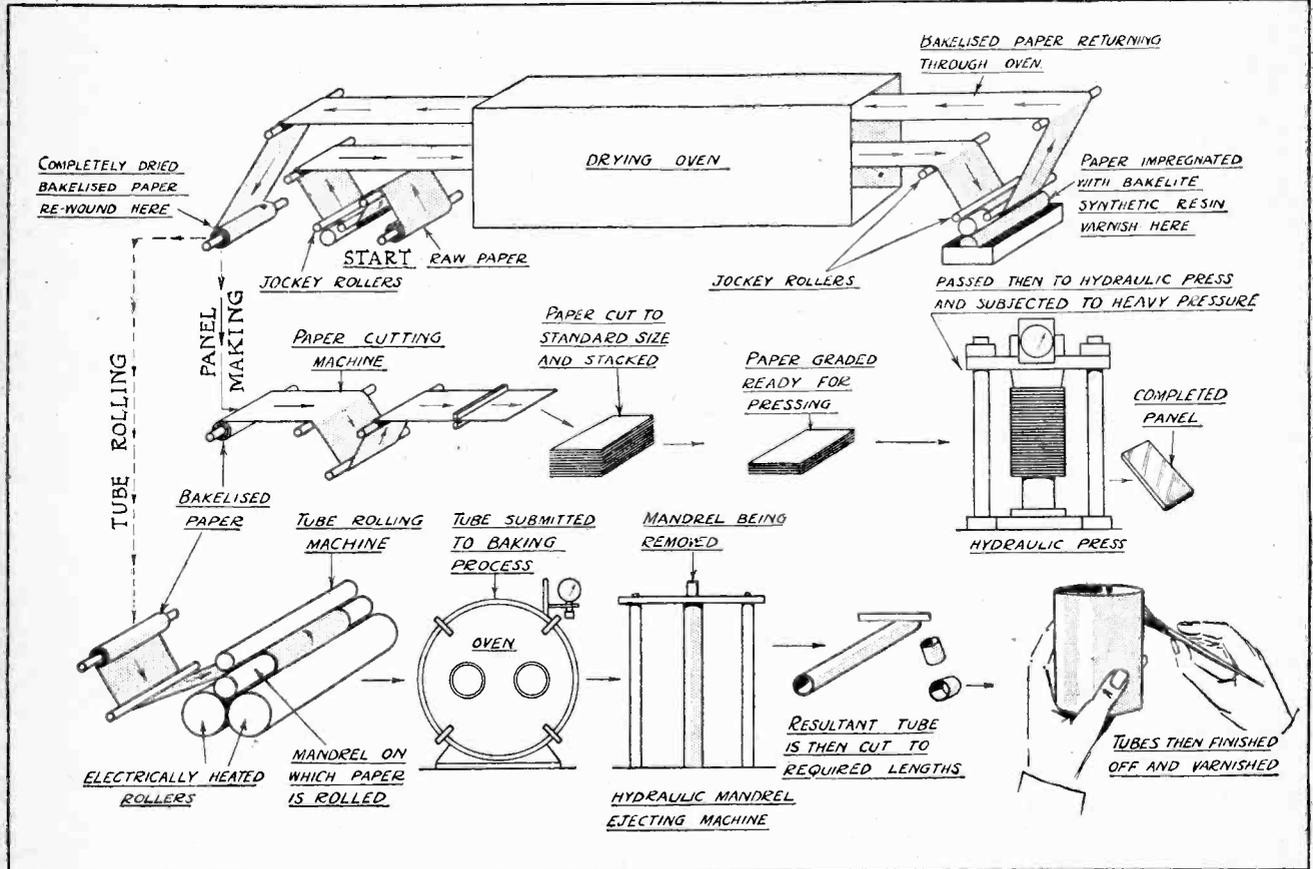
Schematic drawing showing the successive manufacturing processes employed in the production of Paxolin boards and tubes.
